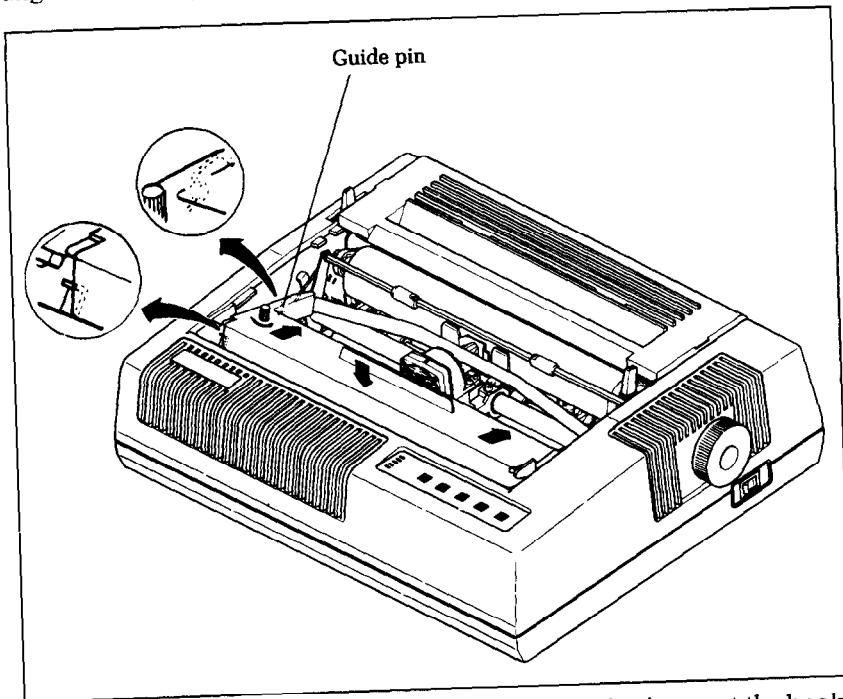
Tilt the ribbon cartridge in until the guide pins meet the hooks in the printer frame, then lower the front edge until the holder springs hold it in place.
